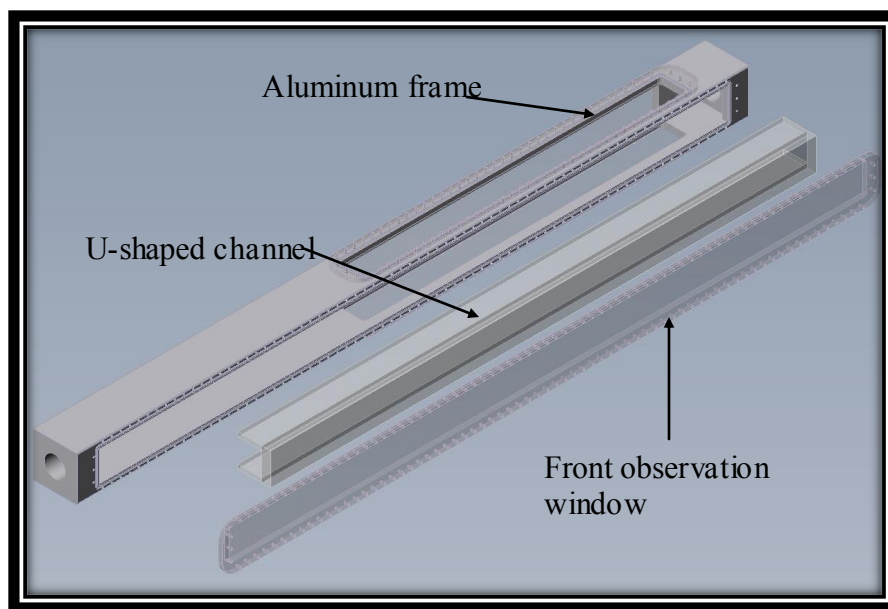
Exploded view of aluminum frame, U-shaped channel and front observation window.
